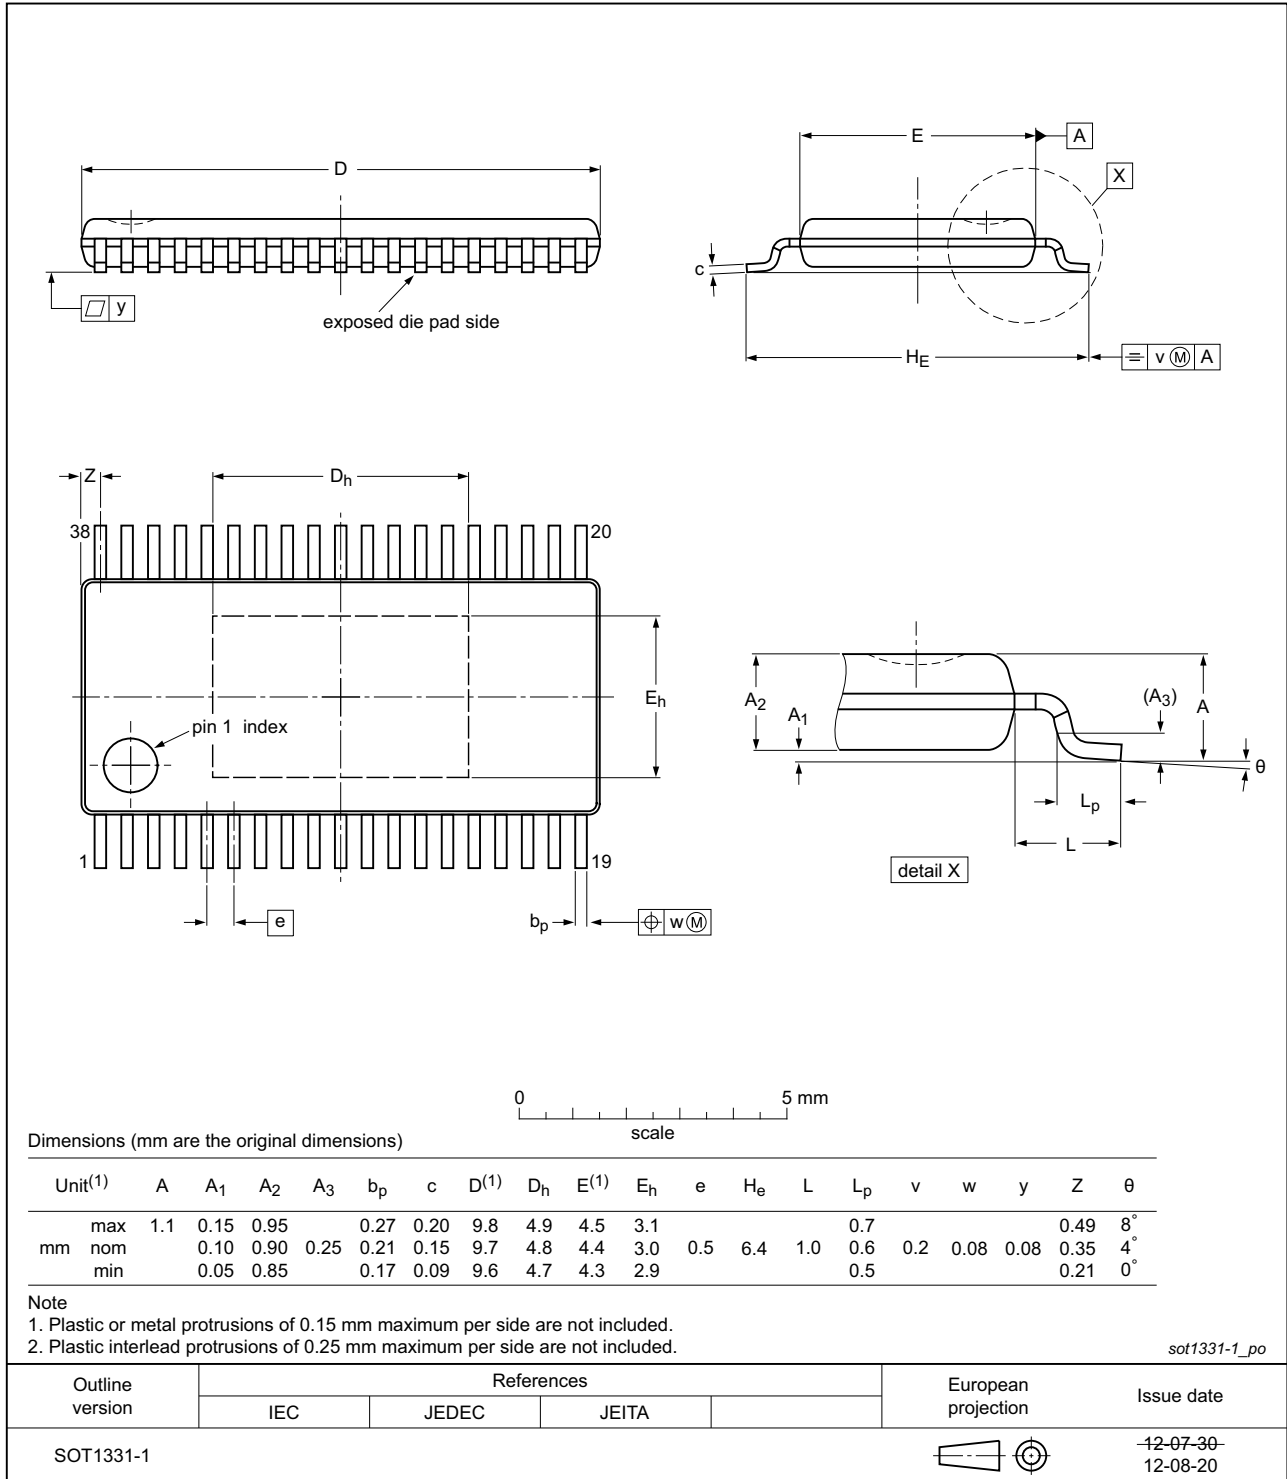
Package outline SOT1331-1 (HTSSOP38)
